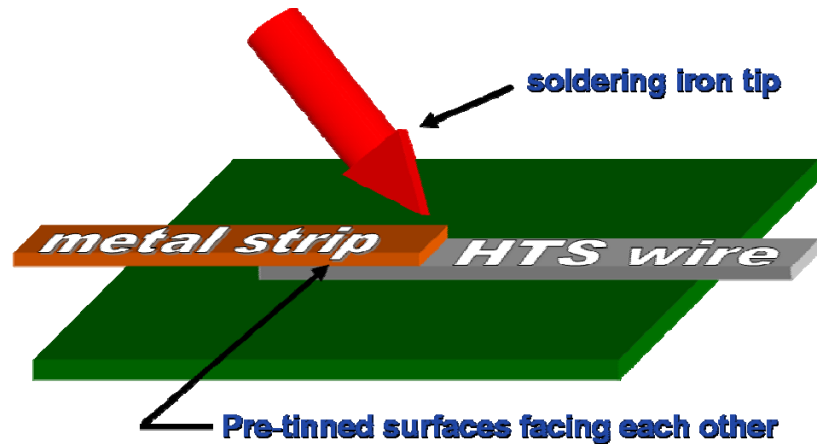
Method of positioning HTS wire and current lead for solder assembly
